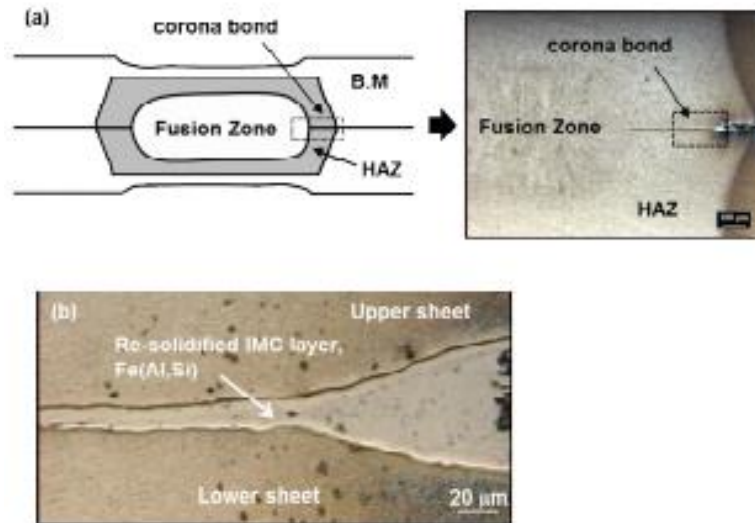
Coating at the periphery of the resistance spot welds in Al-Si coated hot-stamped boron steel[55]
